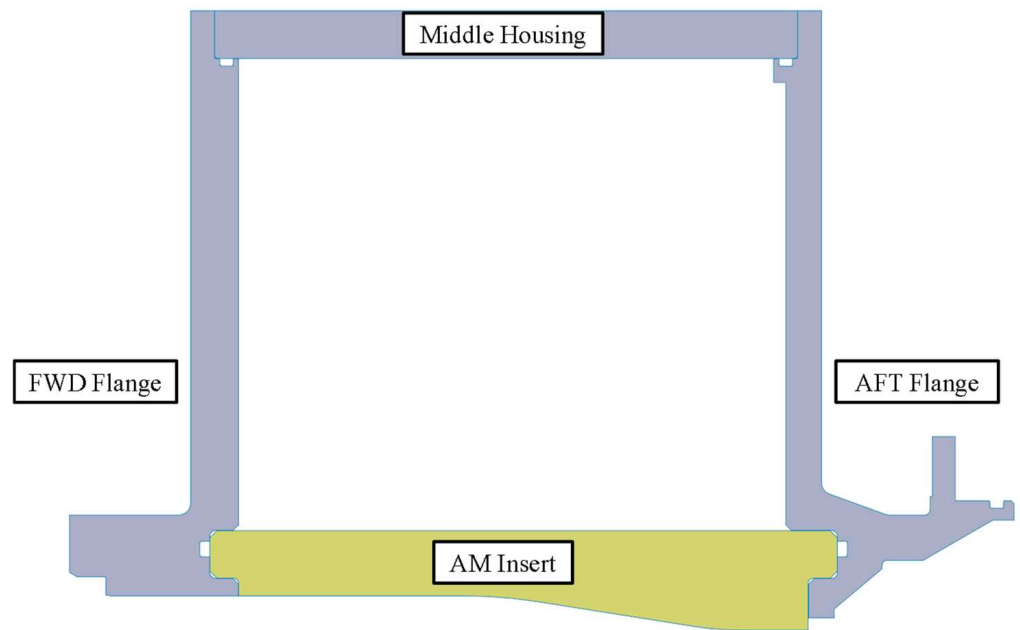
Two-dimensional CAD model for the AM fan casing assembly.
